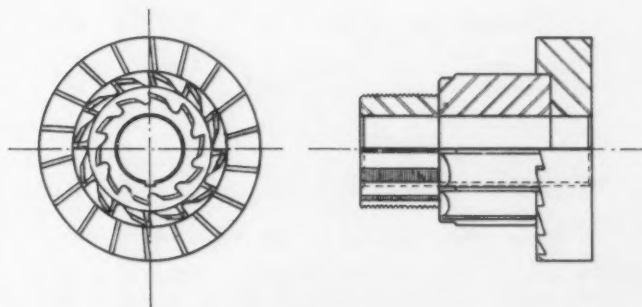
Combination thread miller and form miller. This tool threads, counterbores and faces in one set-up and in the same cycle time.
